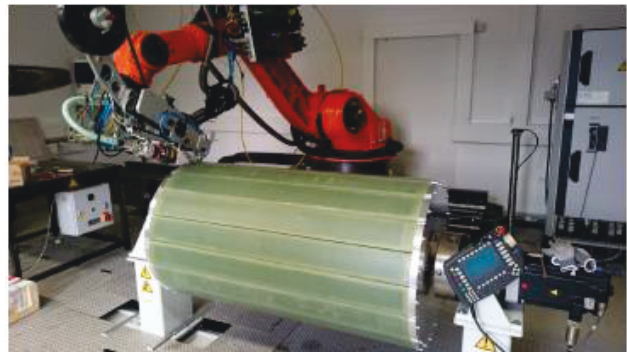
Tooling for demonstrator manufacturing at TUM
